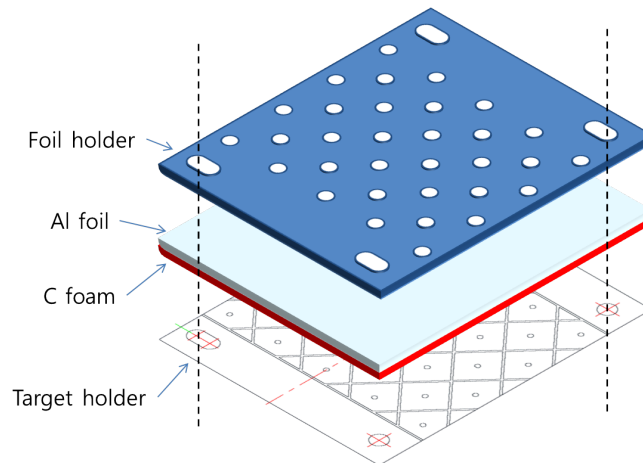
Overall target assembly to be mounted in the GIST target holder frame.
